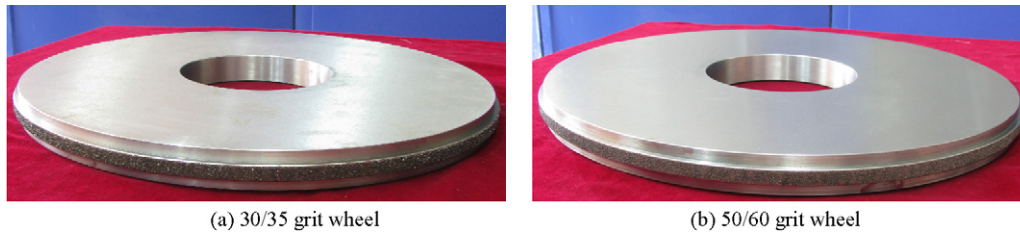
The photos of the brazed diamond wheels: (a) 30/35 grit wheel and (b) 50/60 grit wheel.
